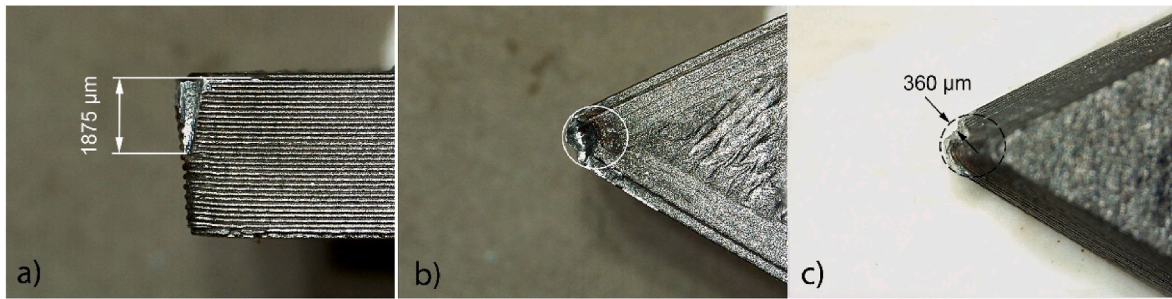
Appearance of the cutting edge at the end of run E6: a) side view, b) top view, d) bottom view ( $V_c = 200$  m/min,  $f = 0.25$  mm/r,  $a_p = 0.6$  mm,  $t = 811$  s).
